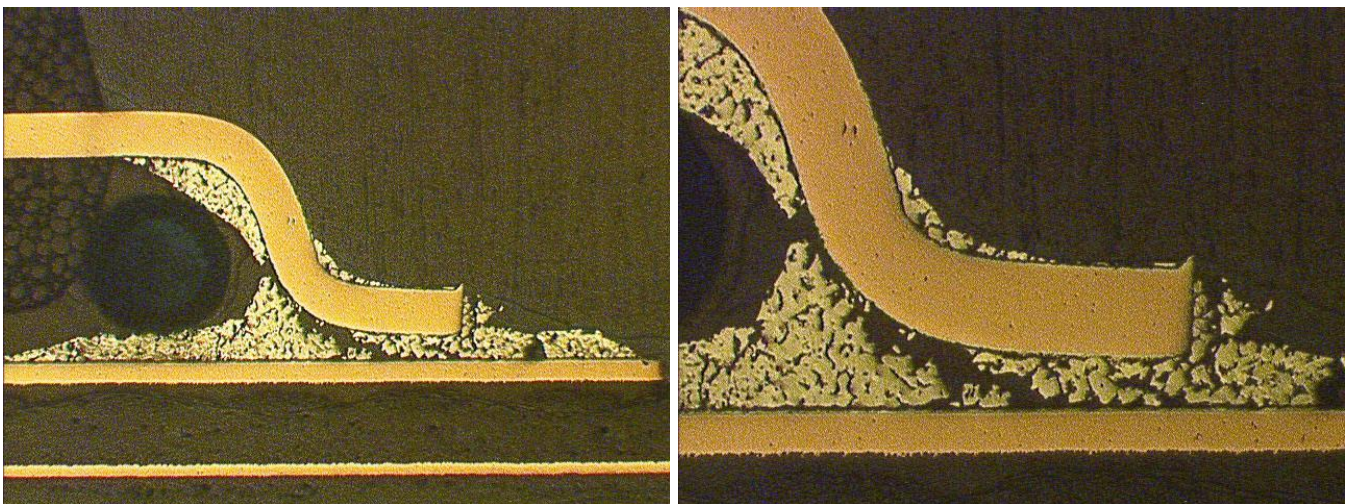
TQFP-144 Solder Joints, Board 9, Component U48, SnPb/SnPb Dipped, Failed @ 2648 Cycles
